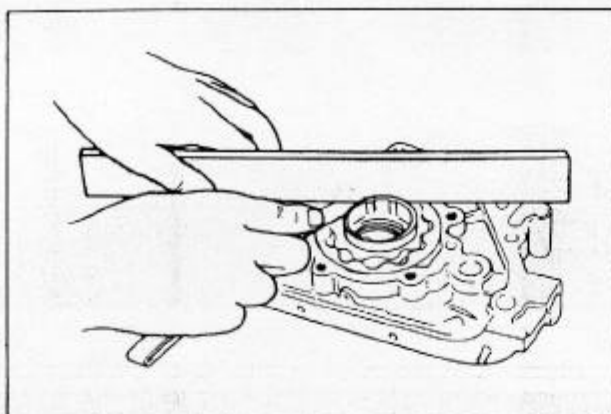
A — 35 MEASURING SIDE CLEARANCE
